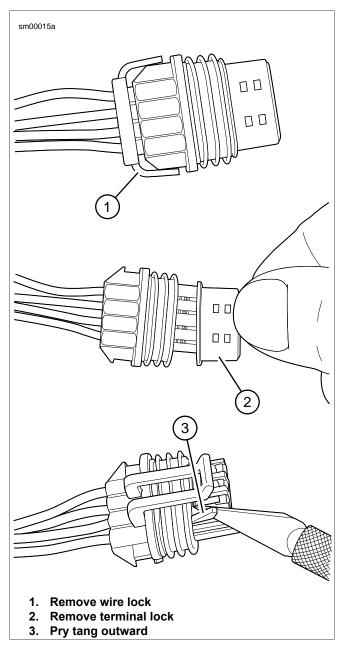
Delphi GT 150 Sealed Connector: Removing Socket Terminals
